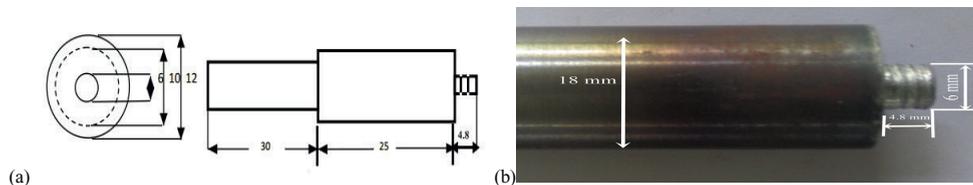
Geometry of tool design (a) Cylindrical threaded tool (b) Snapshot of the tool after welding.
